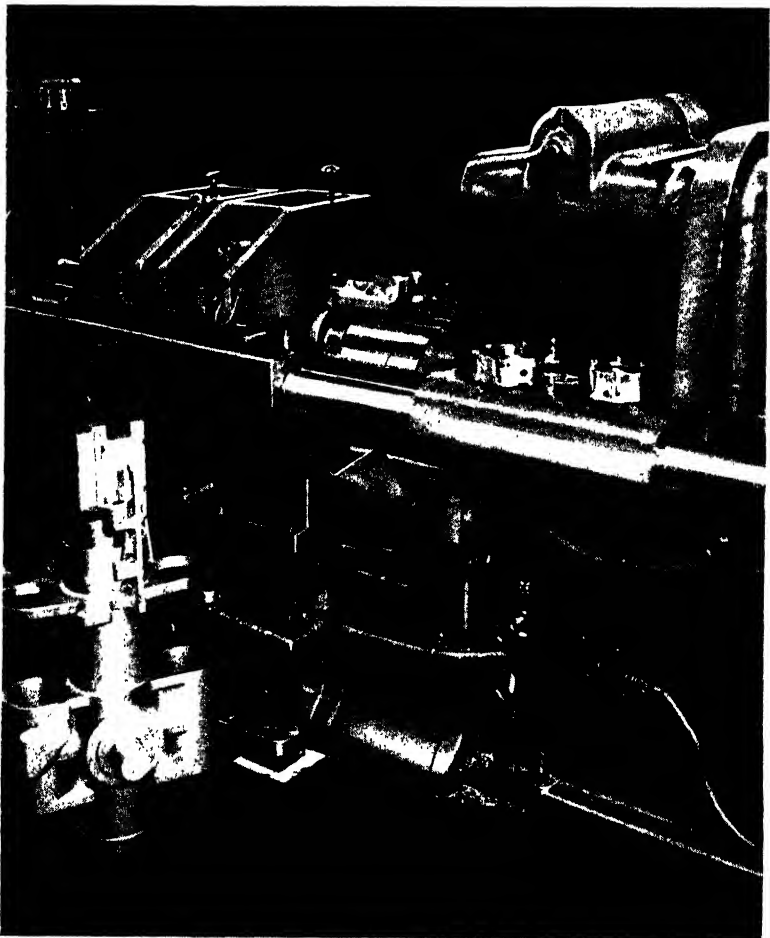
Drilling Three Large Holes Through Molybdenum Steel Forging
